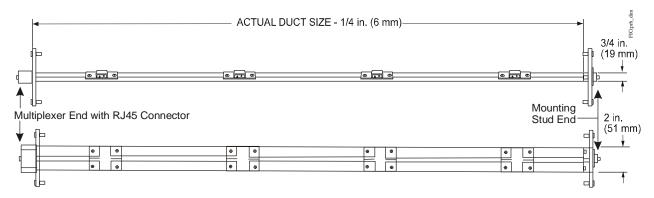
Thermal Dispersion Probe Dimensions, in. (mm)
